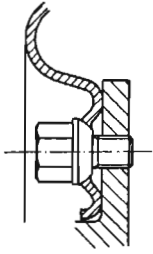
Depression design with special springing characteristics on a passenger car sheet metal disc-type wheel. The wheel can be centred using the fixing bolts or by fitting into the toleranced hole (Fig. 2.24).
